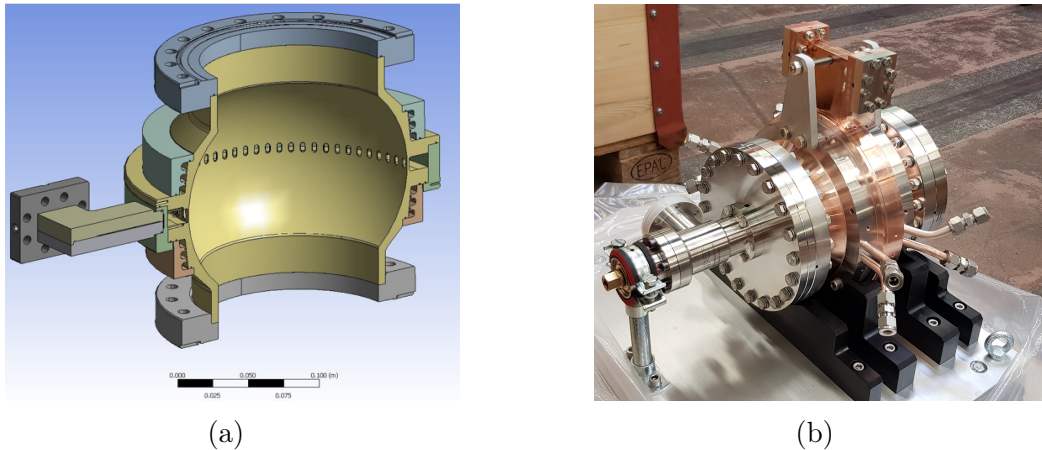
Cross section showing the mechanical design of the BOC (a) and the final assembly at PSI, prior to being shipped to CERN for installation and high-power testing (b) [118].
